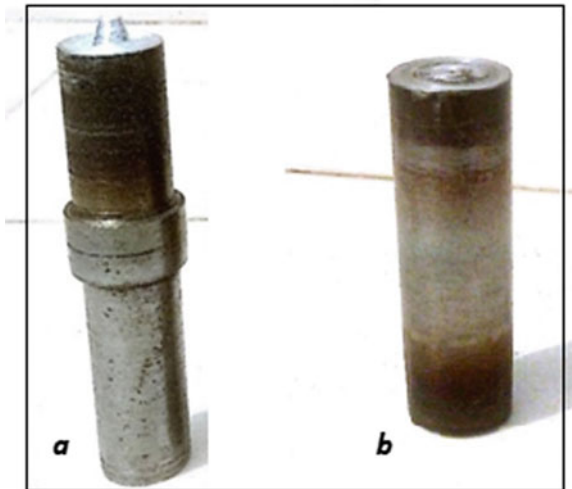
FSP tool, a conical pin, b pinless tool
